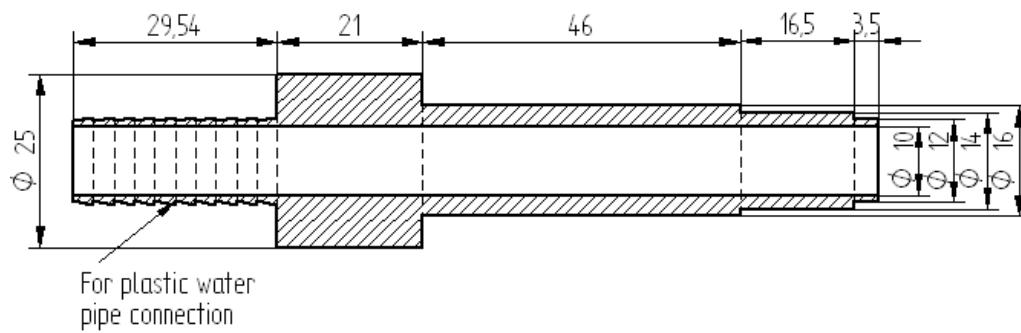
Technical Drawing of the Tight Fit Type of Pipe
